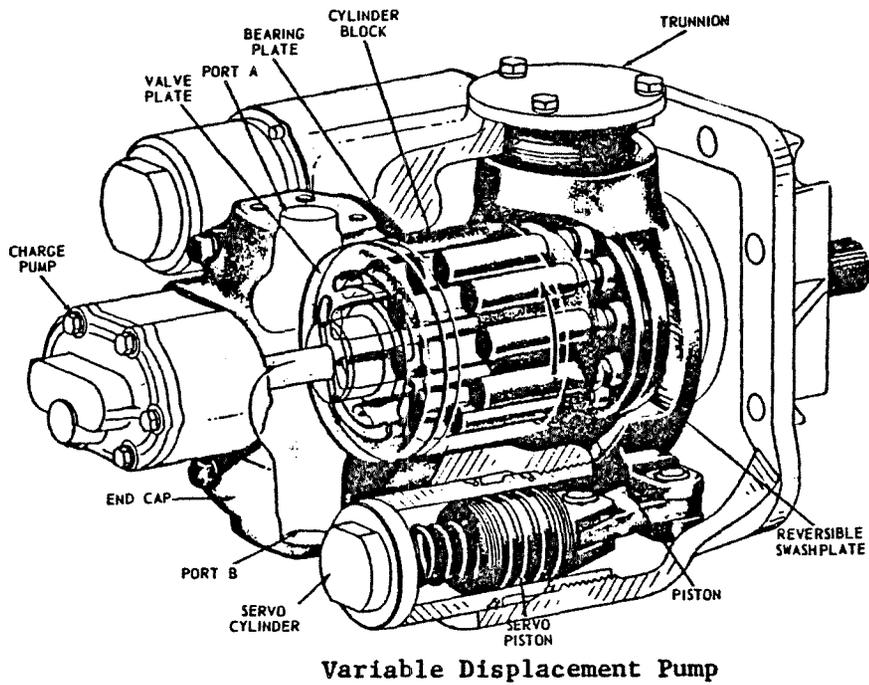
AXIAL PISTON PUMP AND MOTOR
